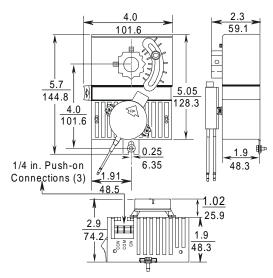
ATP-2040 Actuator/Transmitter Dimensions, in. (mm)
